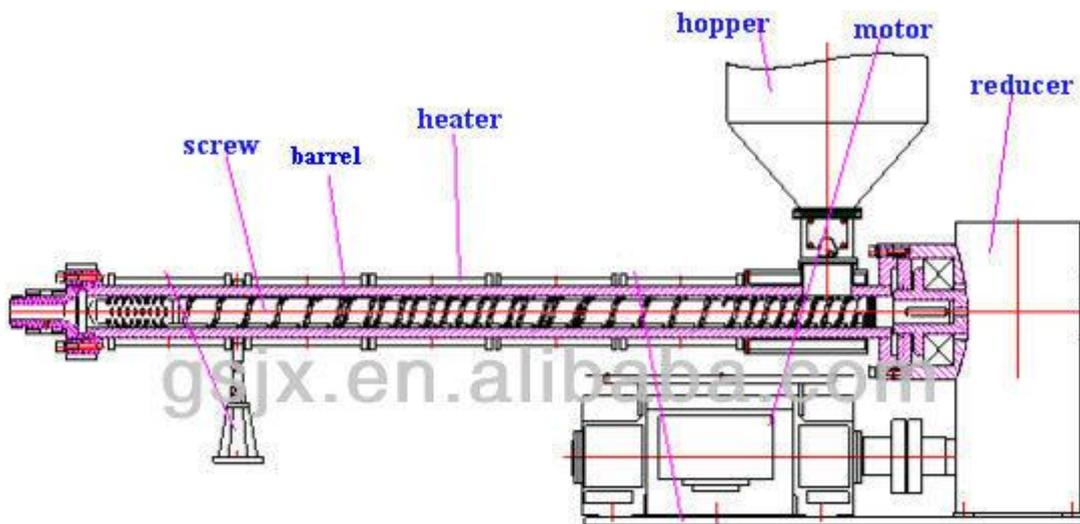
Various component of Extruder machine (Plastic Extruder machine , 2012)
